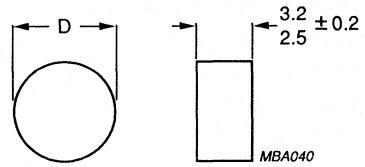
Circular outline, 265 V ceramic; see Table 3 for dimension D.
